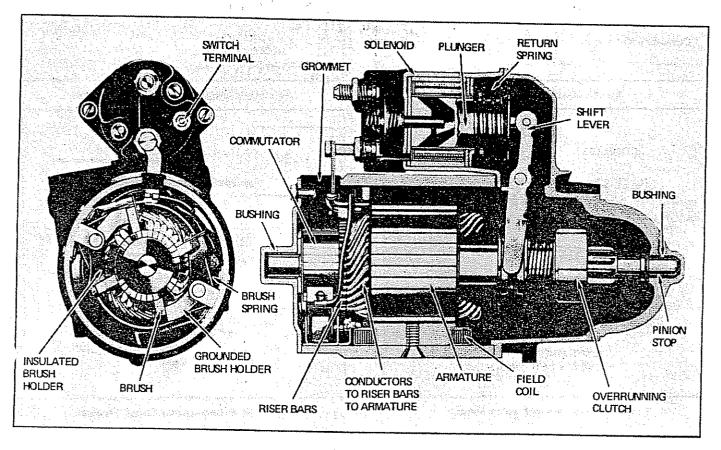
D-1s-Starting Motor Cross Section (Typical)
